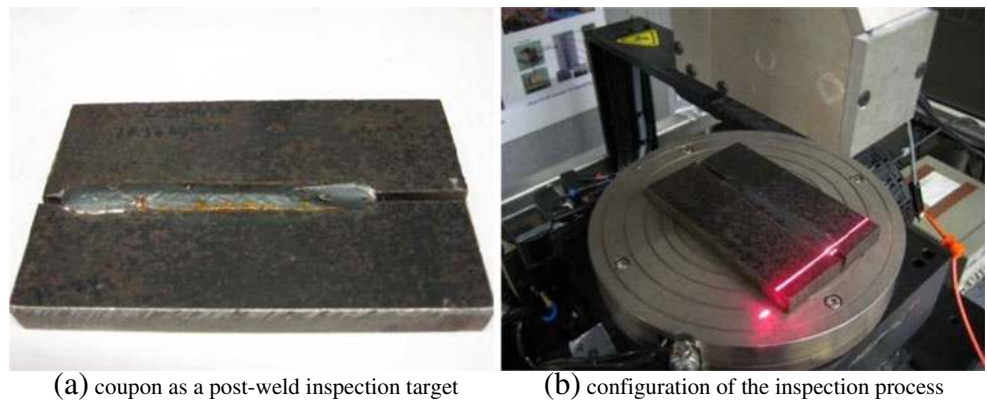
Scanning results of weld groove during the activated and deactivated seam tracking process. a Coupon as a post-weld inspection target, b configuration of the inspection process
